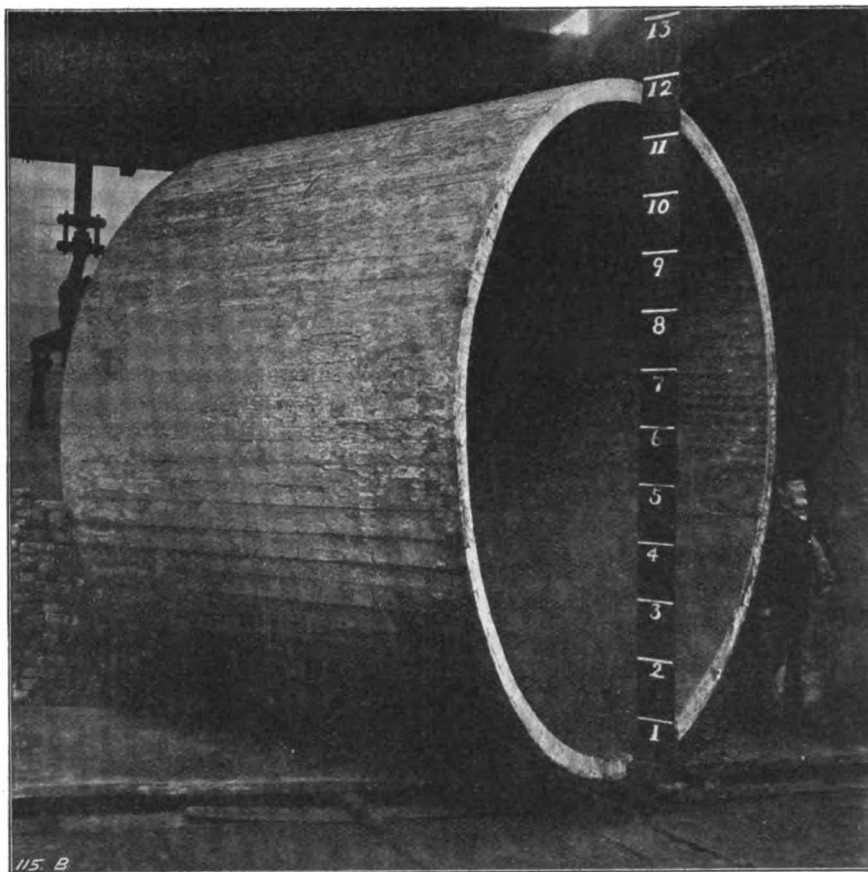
FORGING FOR LOW-PRESSURE TURBINE ROTOR; MESSRS. JOHN BROWN AND CO., LIMITED, SHEFFIELD.
